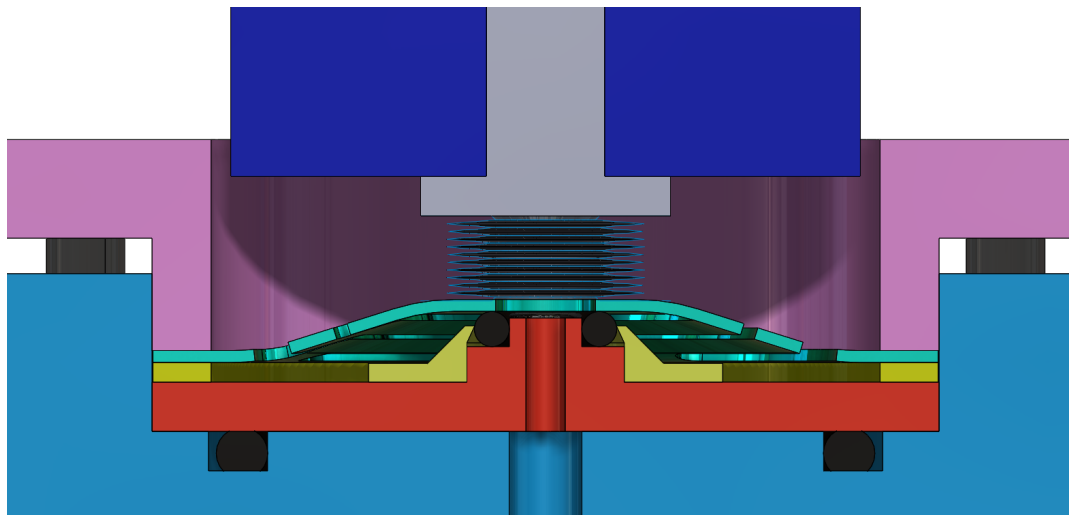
A detailed section view of the CAD of the compliant expansion chamber with exhaust valve integrated in the measurement setup.
